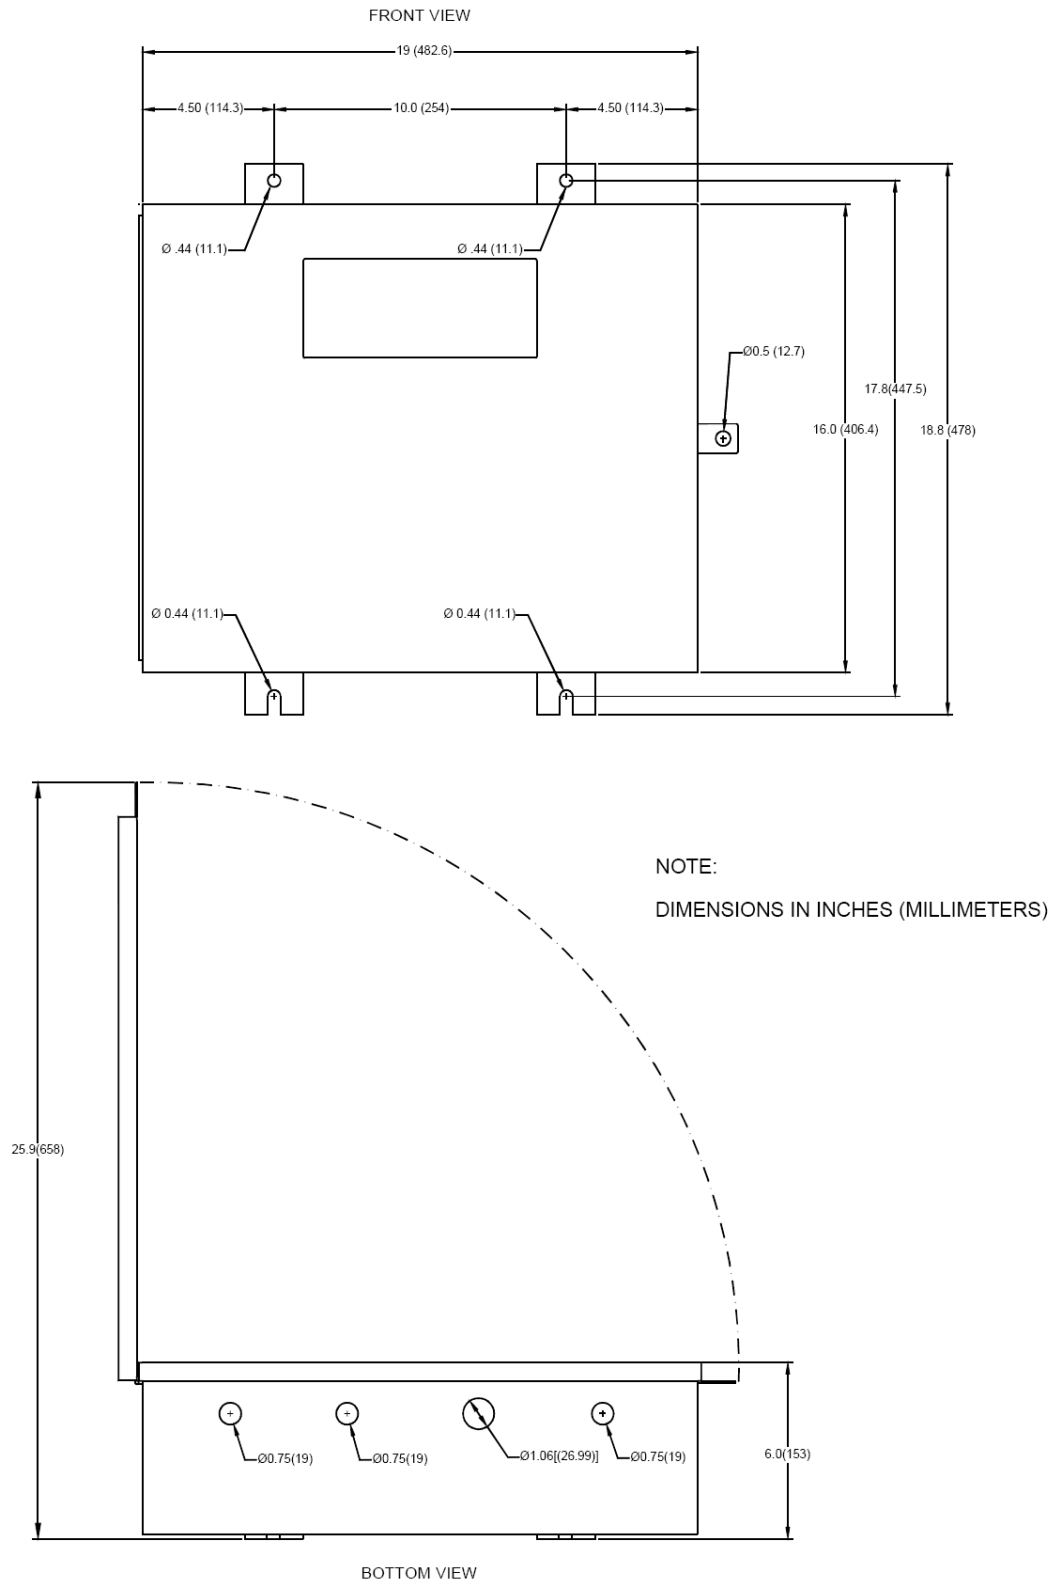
FTC 140-1W Controller Mounting and Outline
